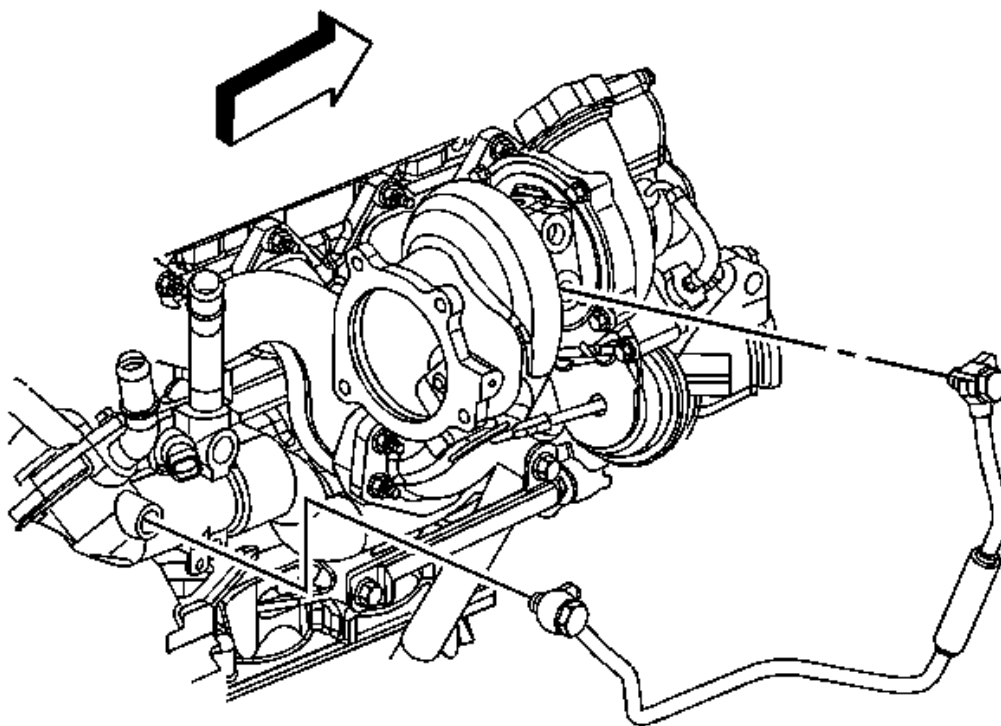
View Of Turbocharger Coolant Return Pipe & Bolts
